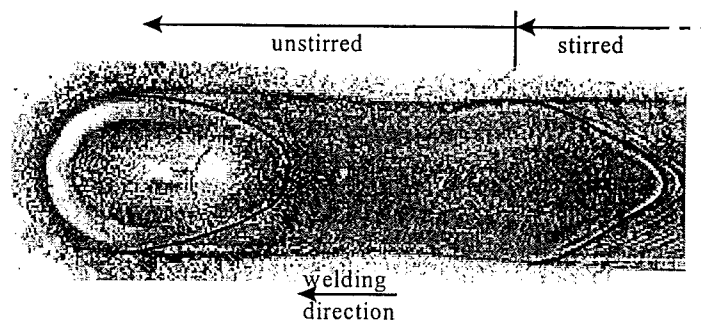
Weld pool shape in unstirred and stirred condition. Lines drawn to show weld pool shape.
